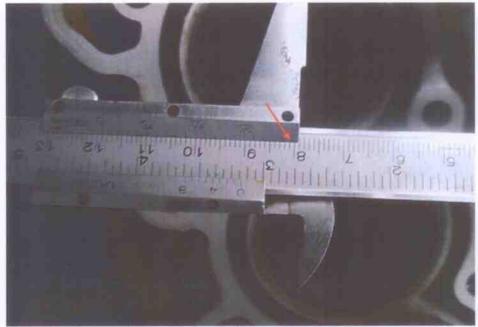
shows the bore measurement of cylinder 2, which was recorded to be 80.50mm.
